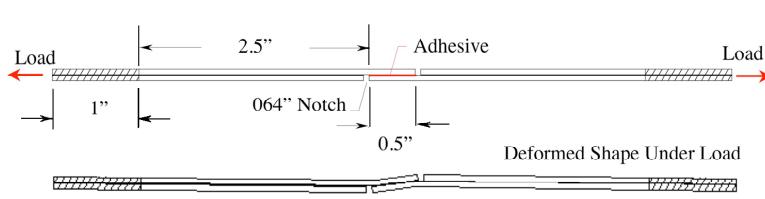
ASTM D3165 Lap Shear Specimen and Oven Test Configuration
